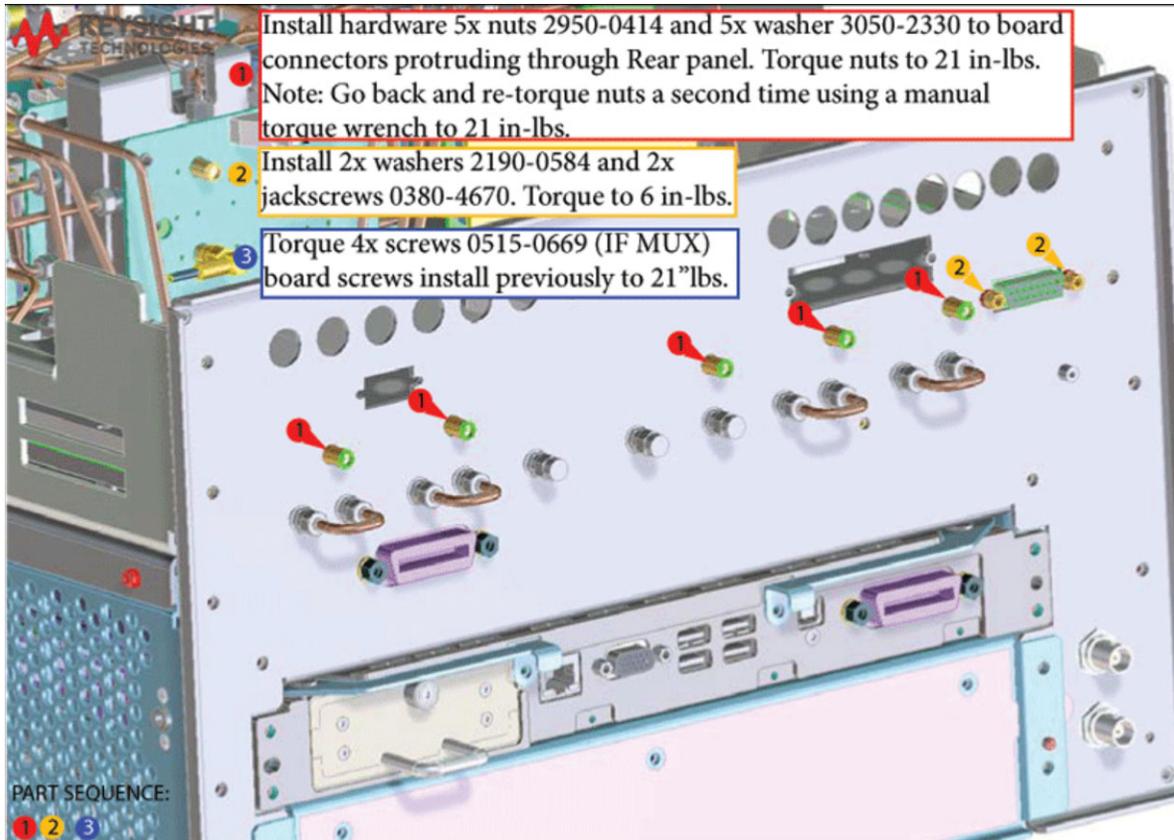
Reinstall the A20 IF MUX Board (N5240-60062 and 0515-0669)
